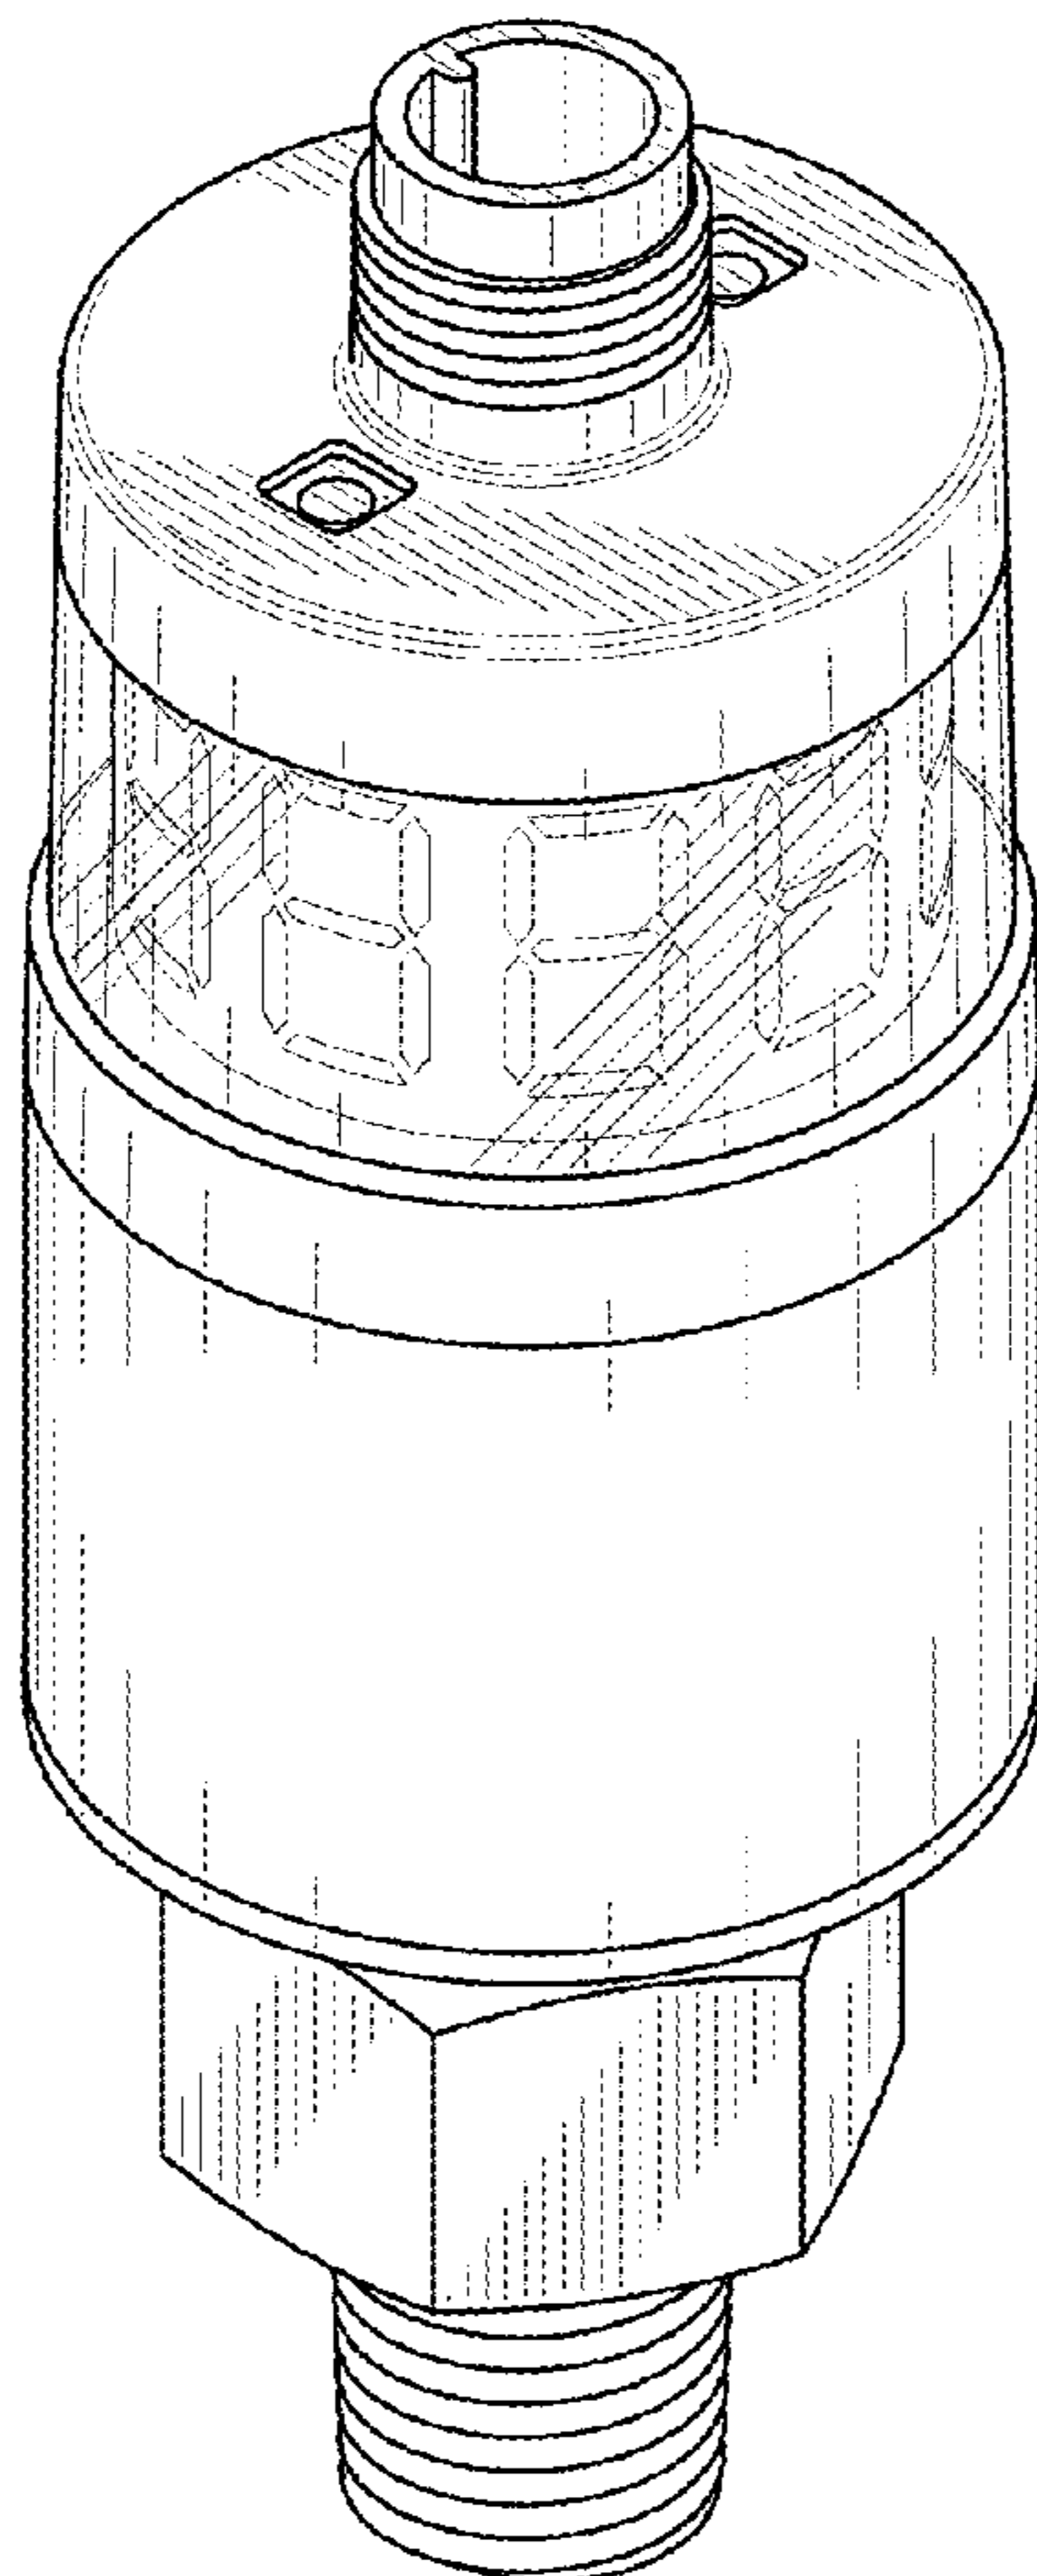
is a perspective view of a pressure sensor in accordance with the new design;
